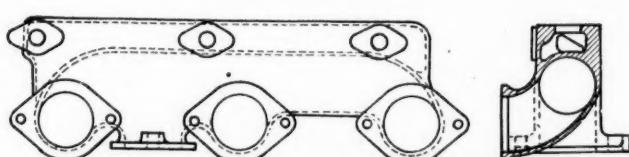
Compact type of header, showing nearness of carburetor to cylinders
